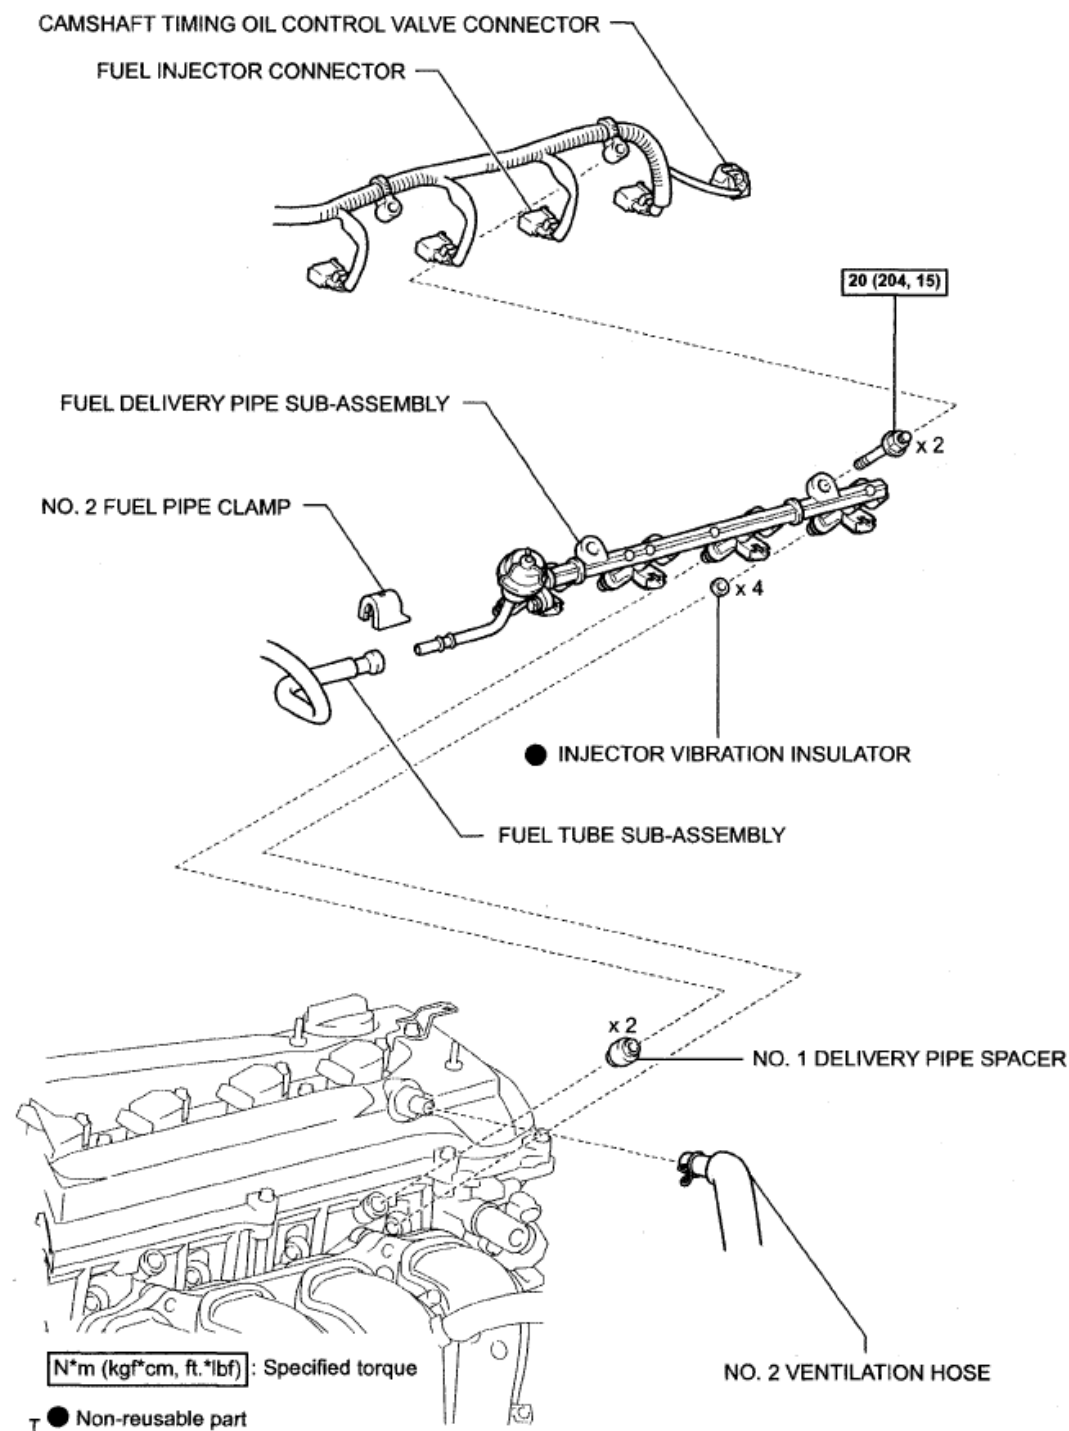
Identifying Cylinder Head Components With Specification (6 Of 13)
